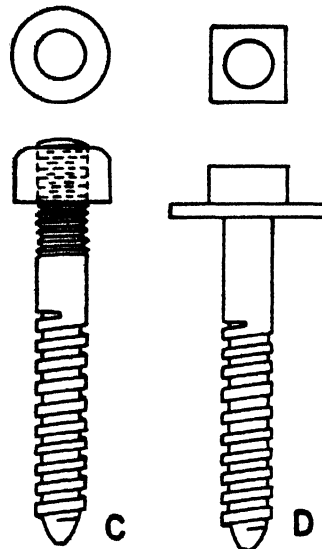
C: hanger bolt, D: lag screw. While the holding power of D is much greater than that of either A or B, the bearing area of the head of D is 79 per cent. of A and only 40 per cent. of B. A washer must be used under the head when bearing on wood. D should not be used when its frequent removal is foreseen. C should be used for holding metal to wood where adjustment or replacement is foreseen
